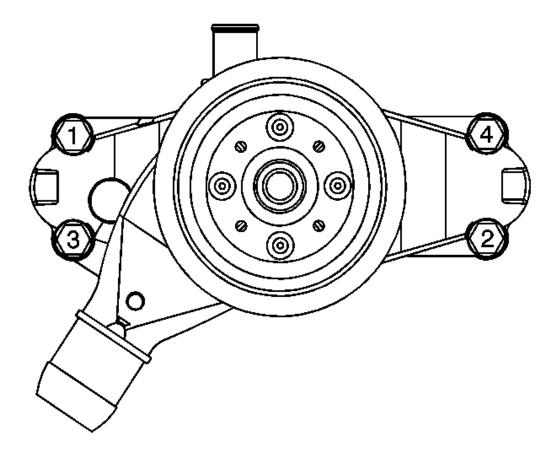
View Of Water Pump & Gasket Courtesy of GENERAL MOTORS CORP.
